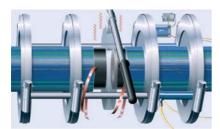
Welding in accordance with DVS 2207, Part 1
